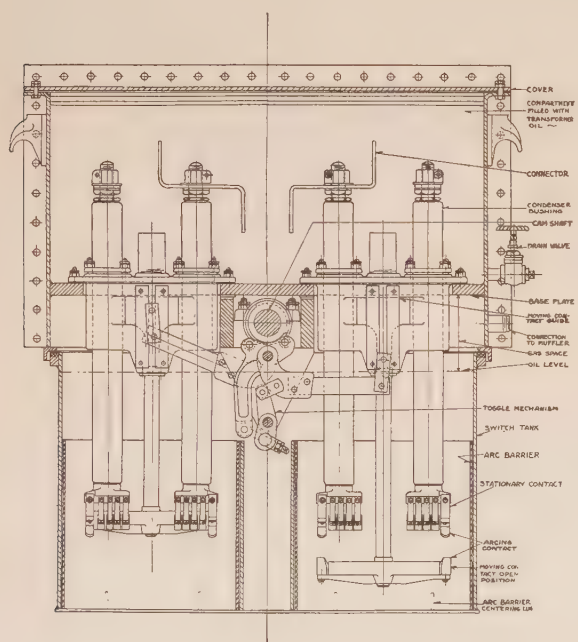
CROSS-SECTION ELEVATION OF THE TYPE "UB" TAP-CHANGING EQUIPMENT
